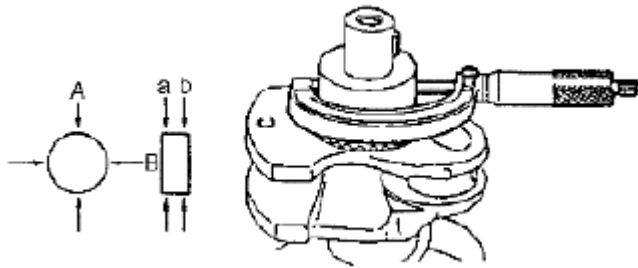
Measuring Out-Of-Round & Taper (Uneven Wear) Of Journals
